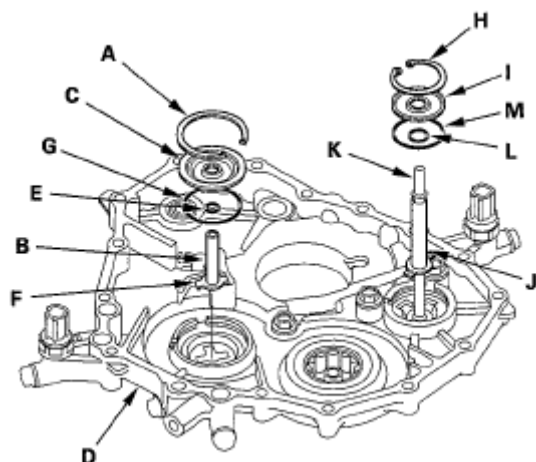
Identifying Snap Ring, 3rd Clutch Feed Pipe And Feed Pipe Flange
